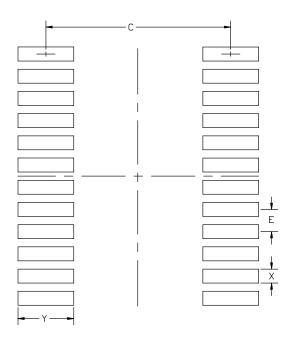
QSOP24 PCB Land Pattern Drawing
